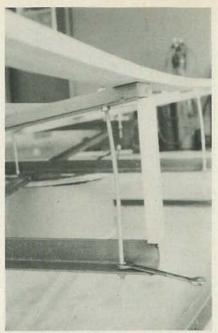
ADJUSTMENT BOLTS are set for proper spacing between vertical frame rib and wood strip. Here a 7½-inch spacer aids adjustment at 72-inch point.
